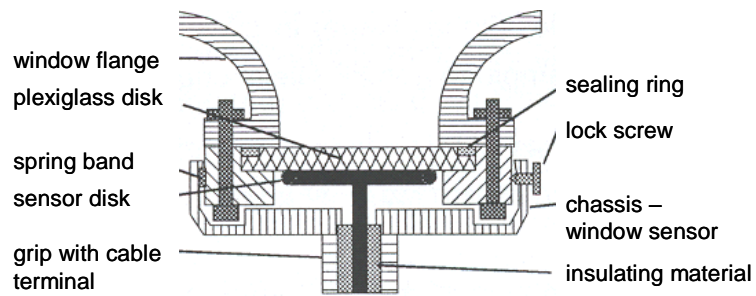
Sectional view and mounting of an UHF PD mobile window coupler [1, 28]
